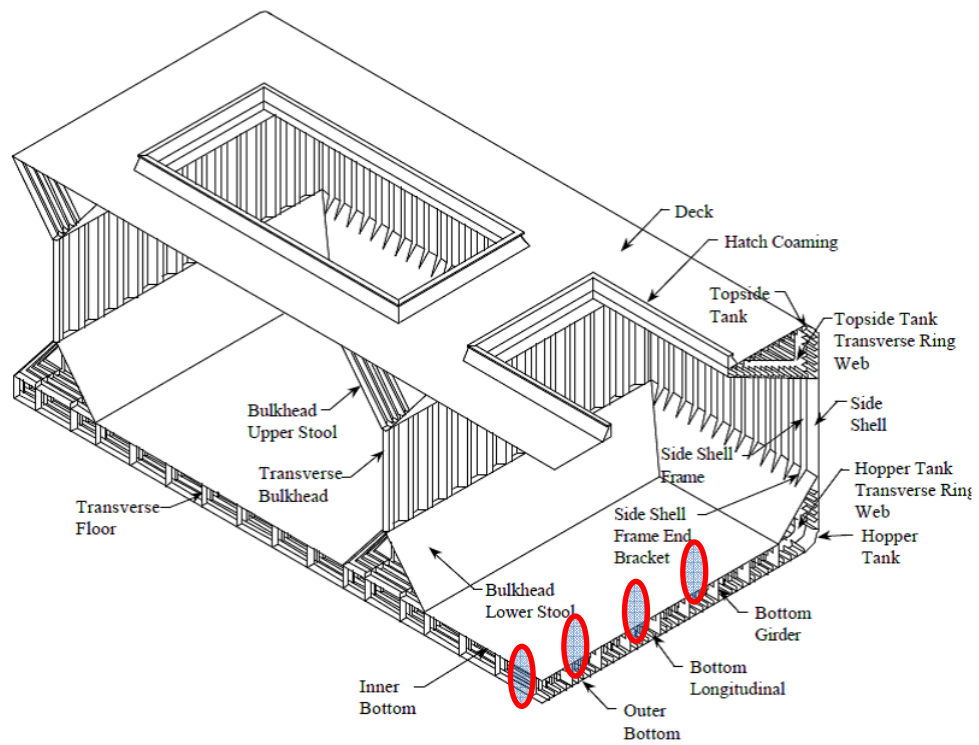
Sketch of Centre girder of Double bottom ballast tank
